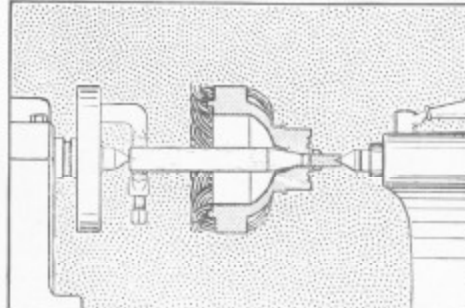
Special taper mandrel for mounting 1928-29 Model A Ford armatures in the lathe.
